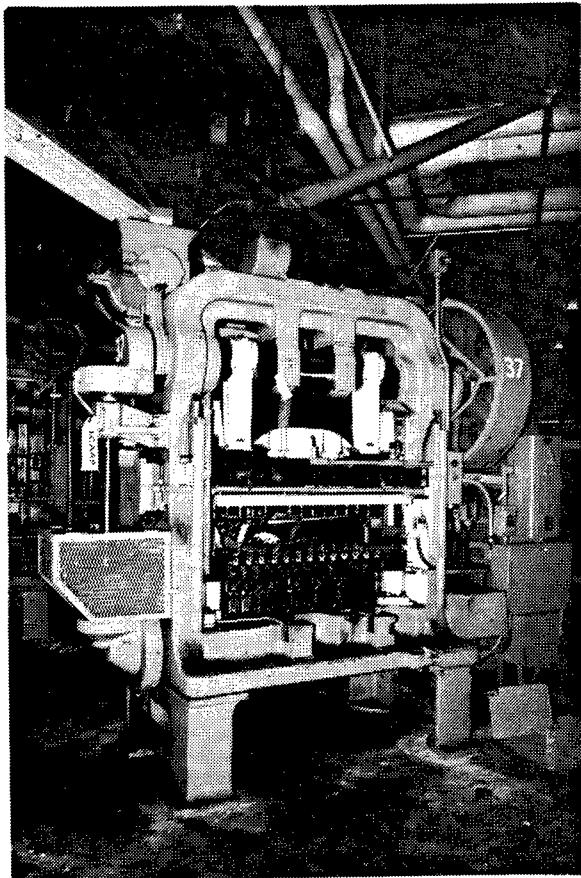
Building 102: Bullet Assembly Machine manufactured in 1952 by Waterbury Farrel.
